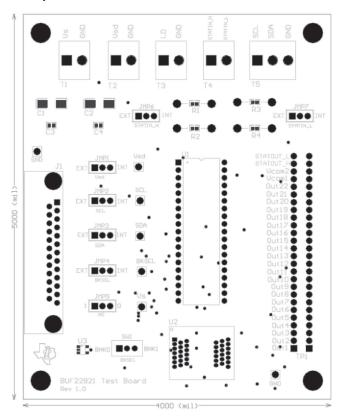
BUF22821EVM-USB PCB Top Layer (Component Layout)
